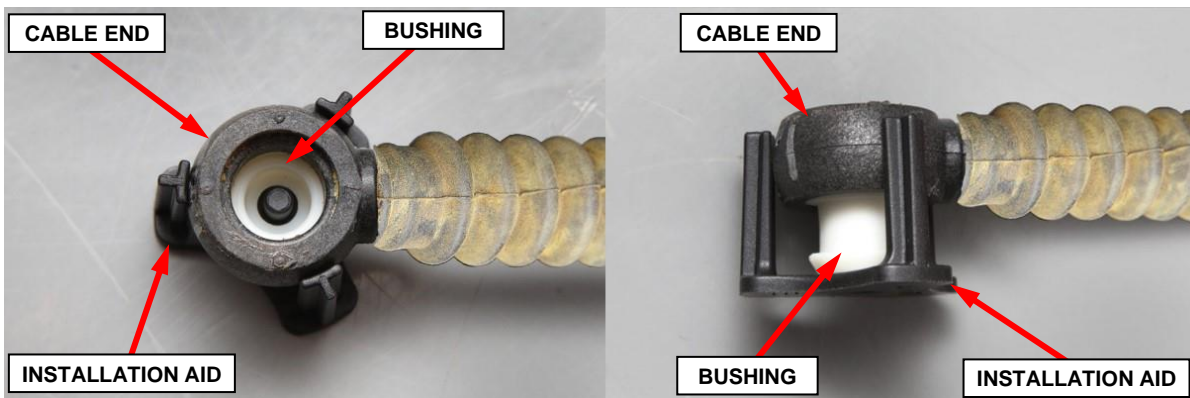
New Bushing and Installation Aid Positioned on Cable End
